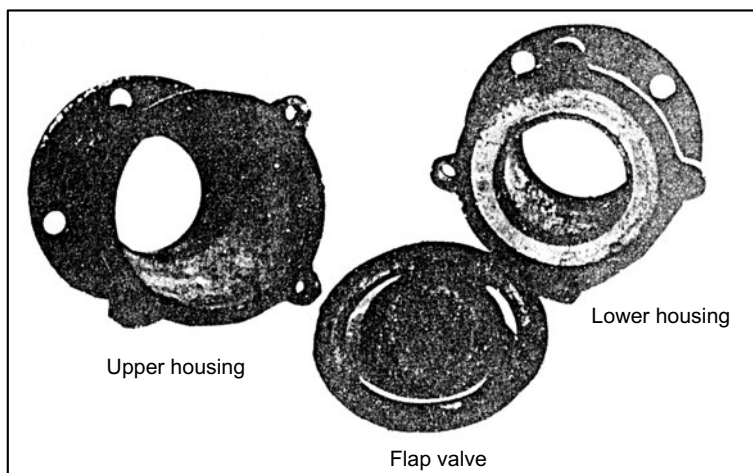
Exploded view of a reflux valve without inspection plate
